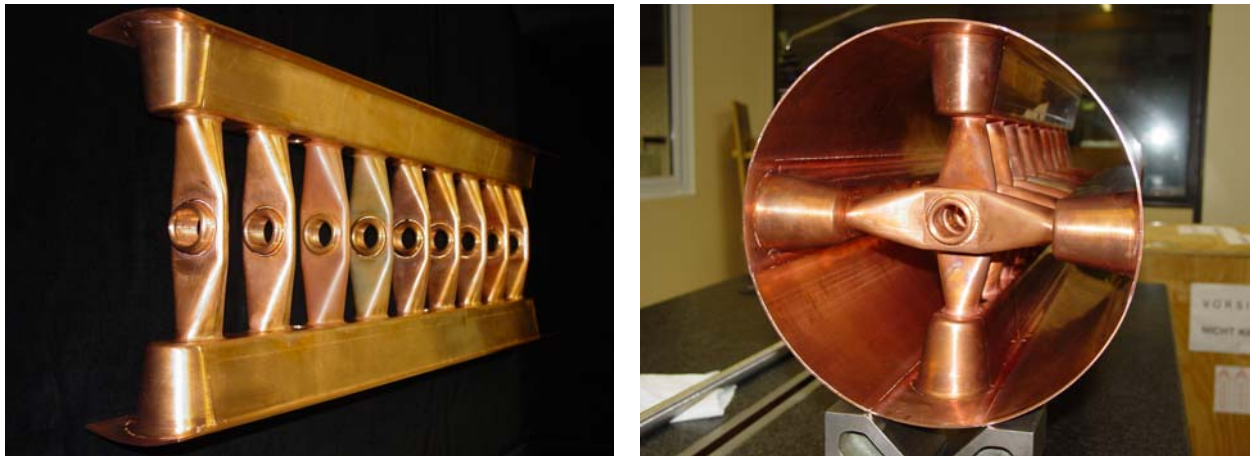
Part of the inner structure made out of copper to optimize the fabrication technology (left), the completed 1:1 CH-copper prototype cavity (right).
